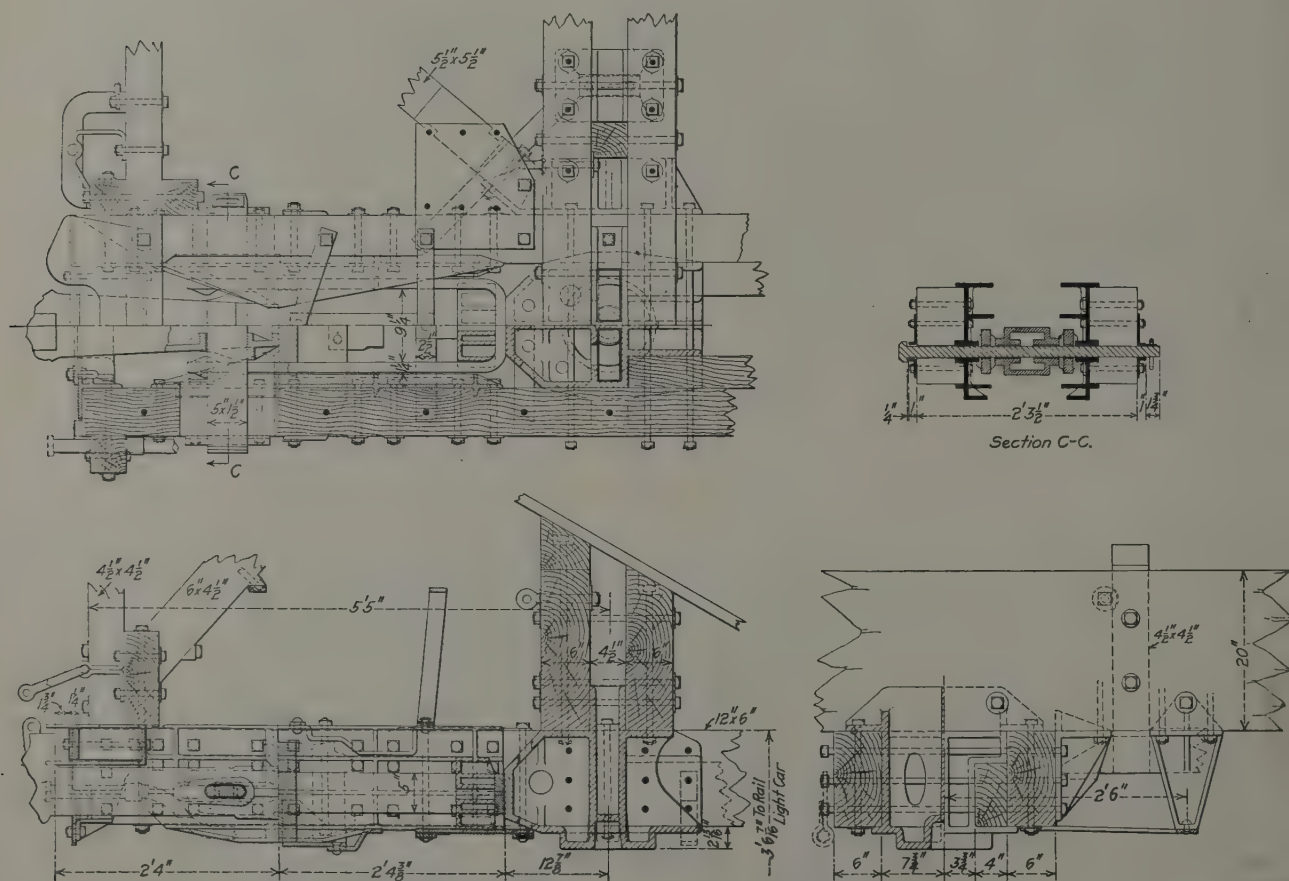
Draft Gear and Bolster Details. Wooden Hopper Car Shown in Figs. 81 and 83.
